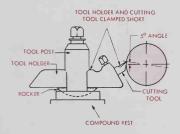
Tool holder and cutting tool properly adjusted.
